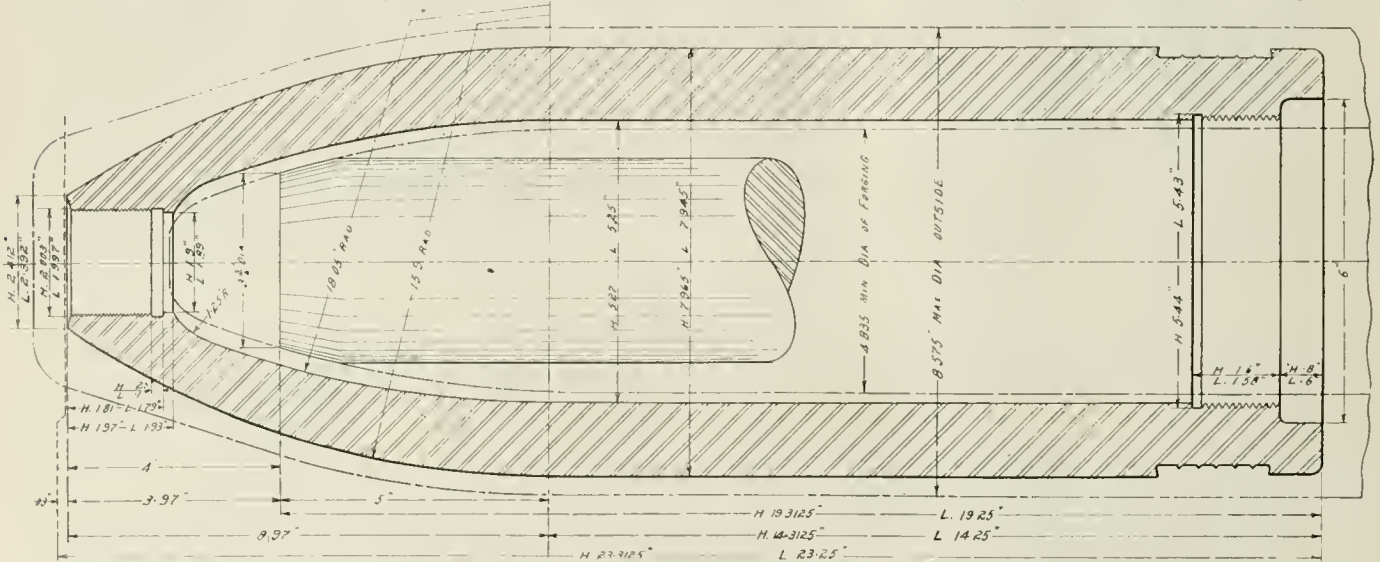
DIMENSION SHEET FOR PRIMARY OPERATIONS, WITH SECTIONAL VIEW OF FINISHED SHELL, ALSO OUTLINE OF ROUGH FORGING.
